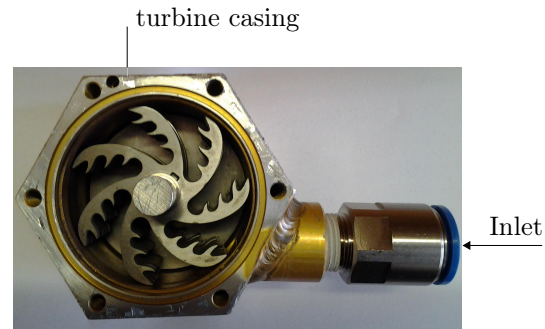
ITmini turbine rotor fitted inside the turbine casing
